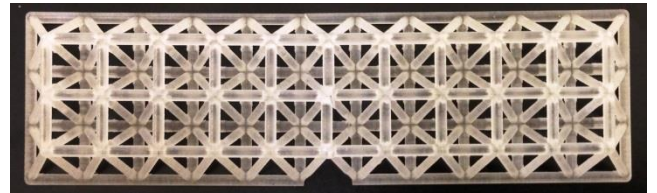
Reassembly of specimen G3 after three-point bend testing resulted in complete fracture of the beam.
